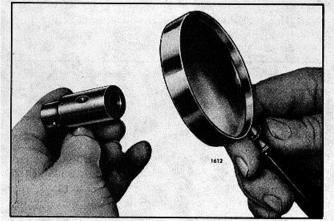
Examining Sealing Surface with a Magnifying Glass
